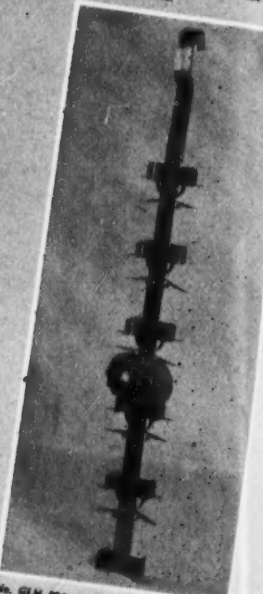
This type of fixture is designed primarily for castings such as the one shown or of similar shape. The overall length of this particular fixture is 5' 0". For a sample of the place to be racked, in order to facilitate its design and manufacture.
